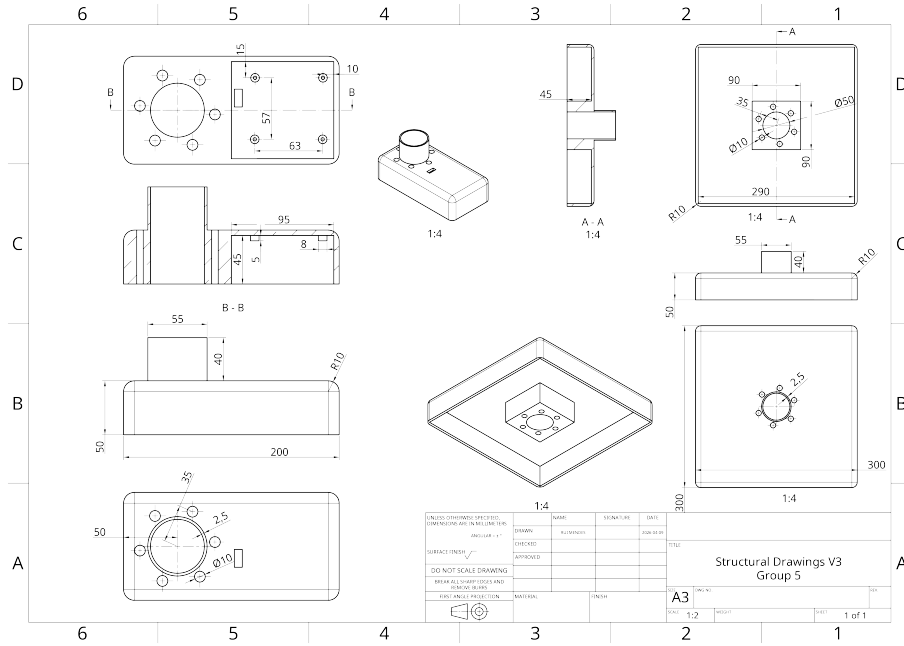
Serviceable sensor-node enclosure drawing used to identify mounting geometry, cable openings, and access points during replacement work.
